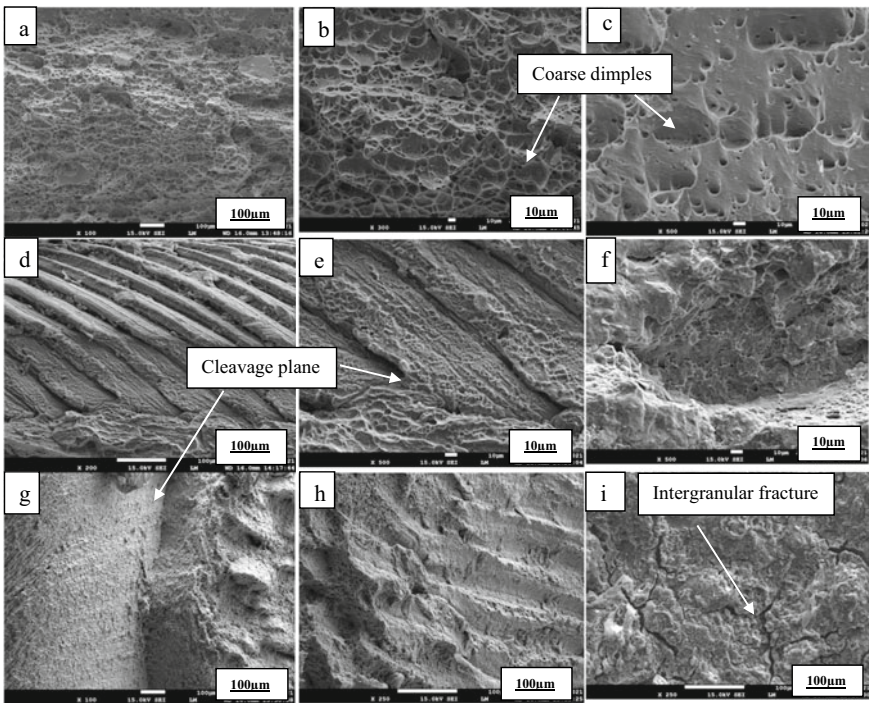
Fracture morphology of CT specimen a–c base material, d–f welded specimen made at 1100 rpm, g–i Welded specimen made at 1500 rpm
